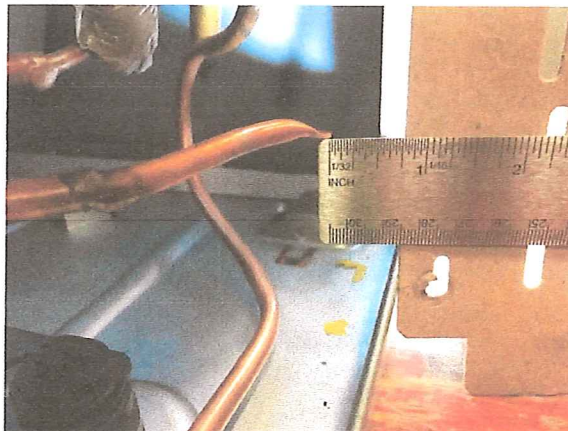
Distance between Charge Tube's End and Fibrous Panel
